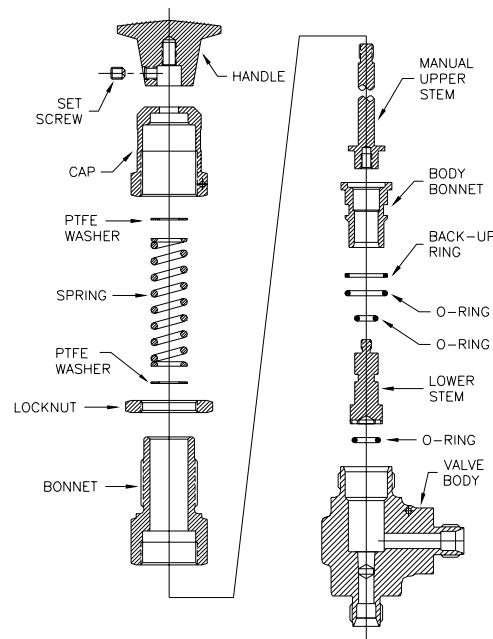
RL Series Relief Valve with Manual Override Exploded View
